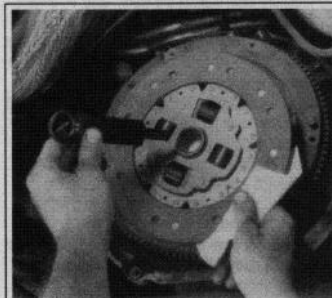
Typical clutch alignment tool, note how the splines match the transaxle's input shaft
